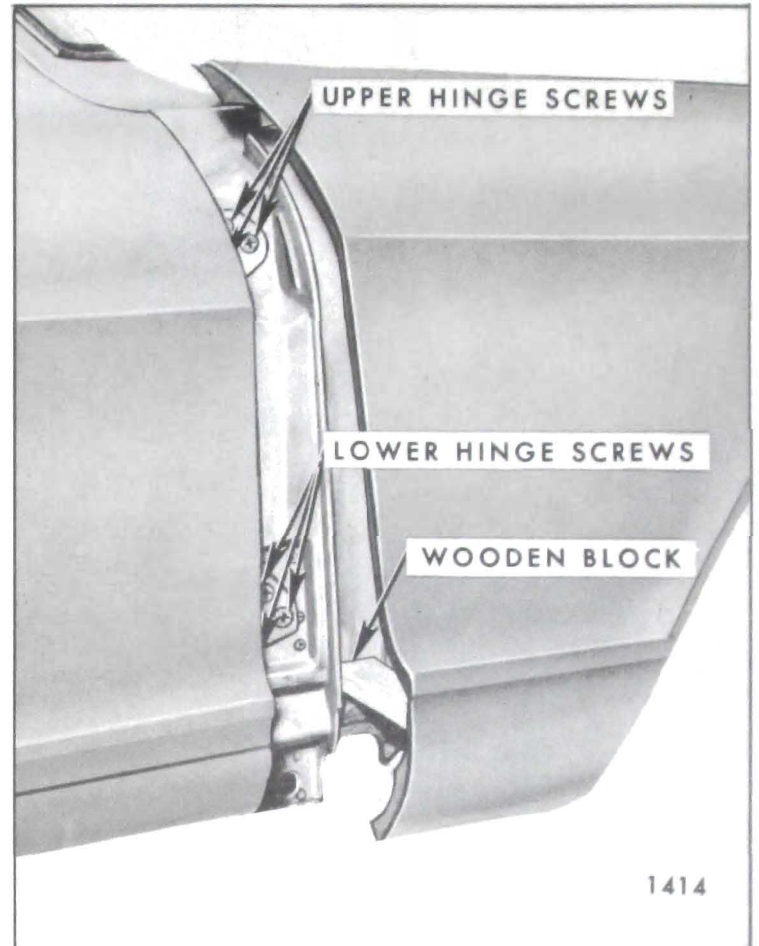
Front Door Hinge Removal - "X" Styles
